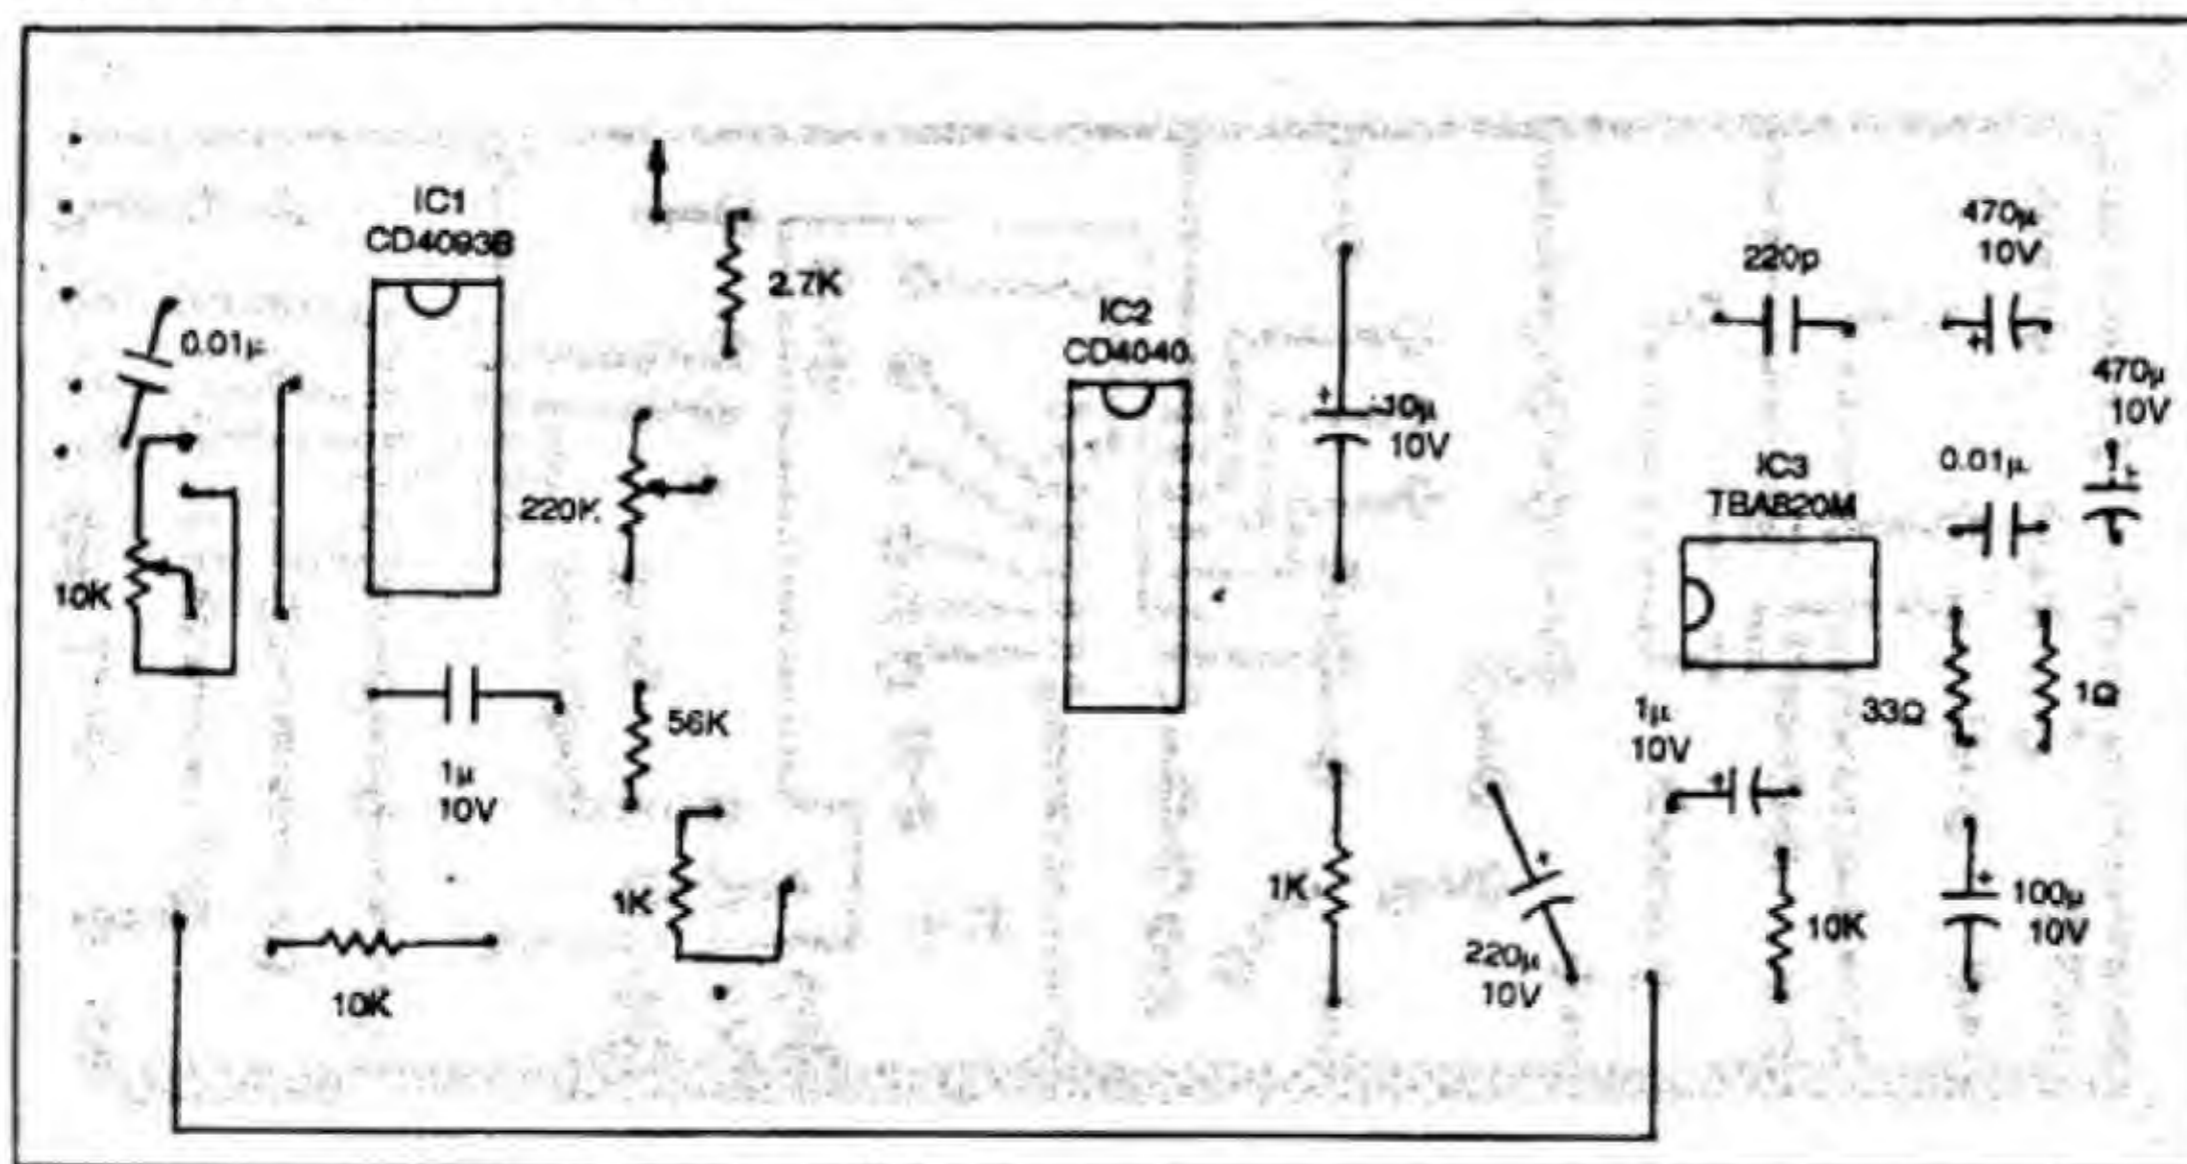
Component layout for the PCB layout shown in Fig. 3.
